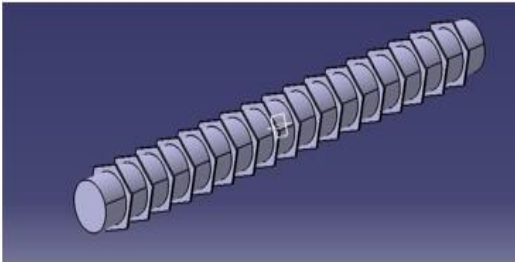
3d Model of hexagonal Finned Tube Evaporator
